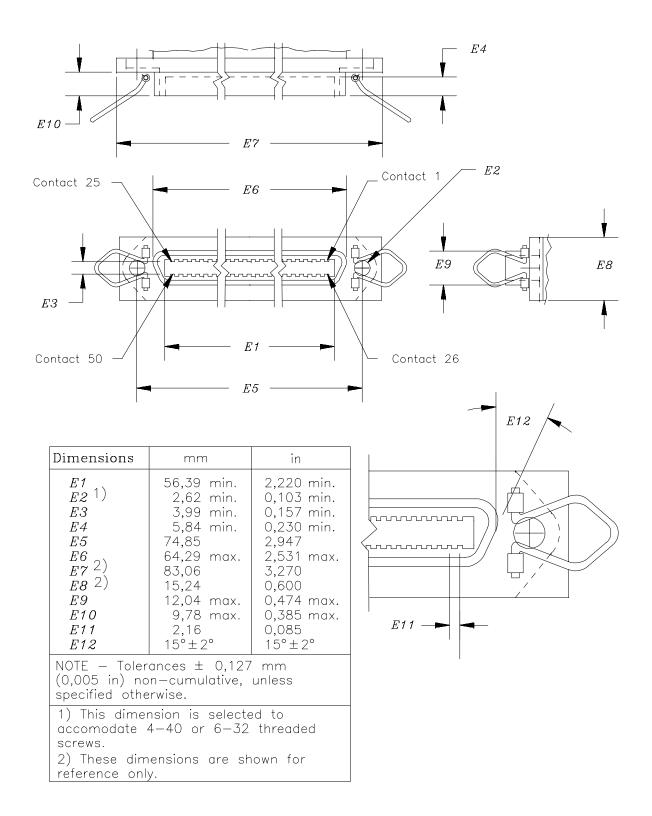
50-contact alternative 2 shielded SCSI device connector (A cable)
